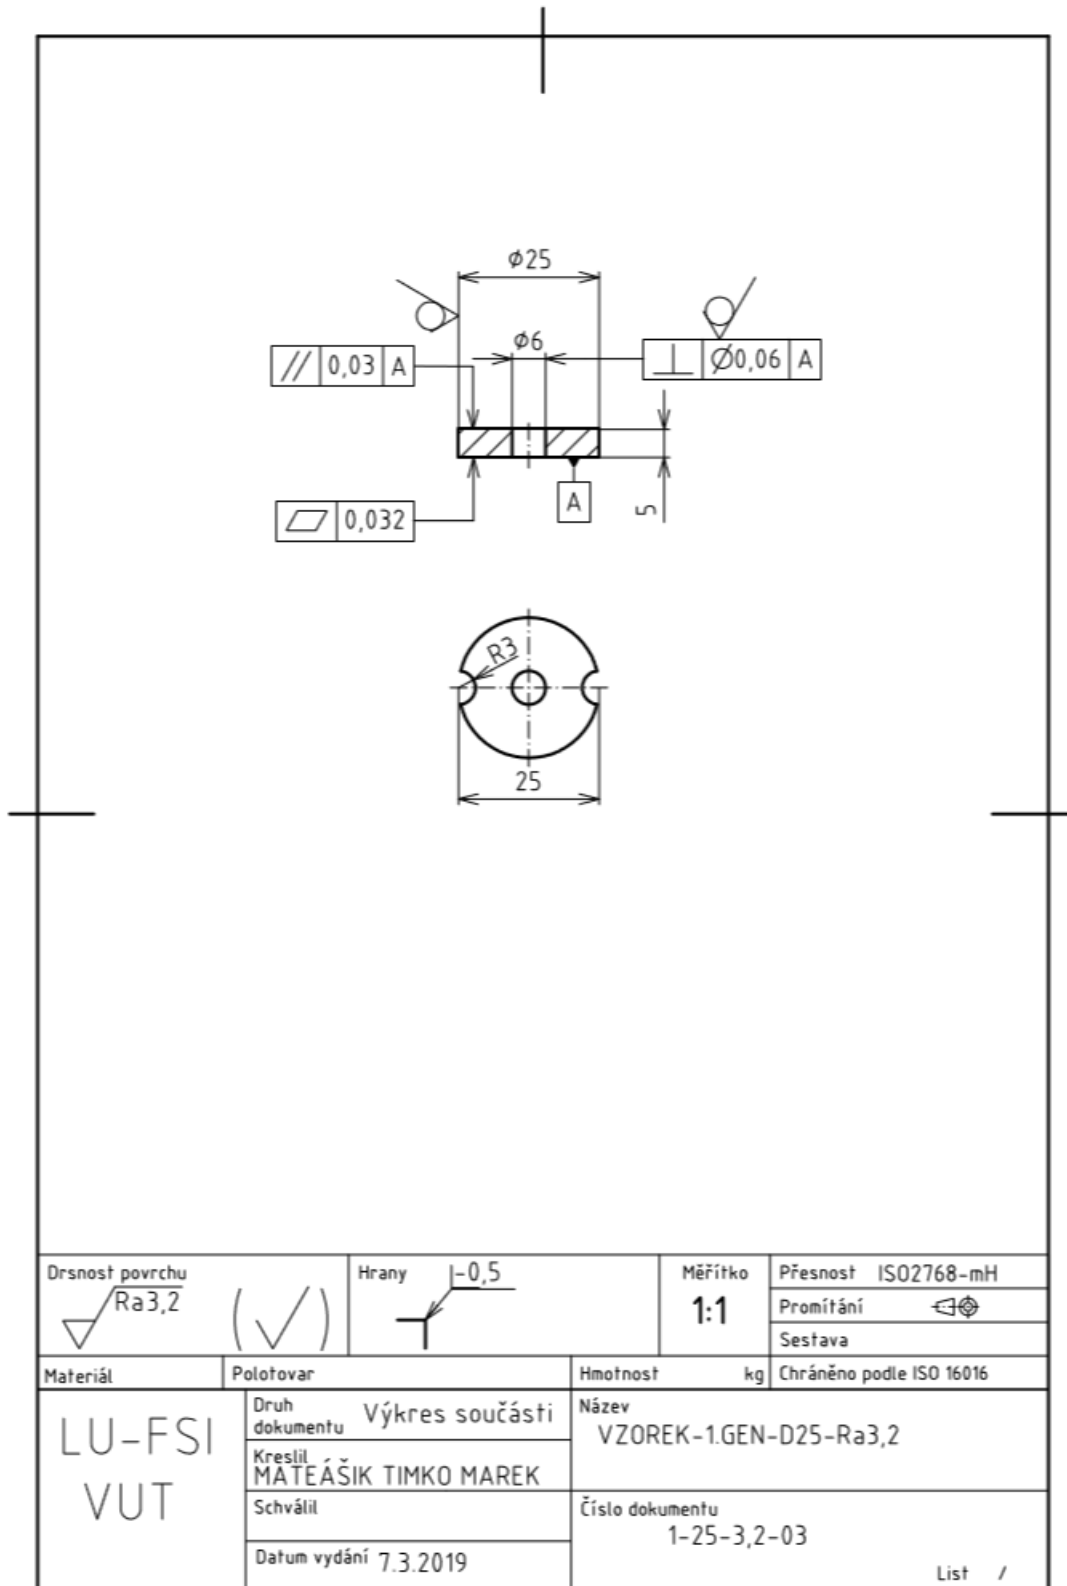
Mechanical drawing of specimen with diameter of 25 mm.
